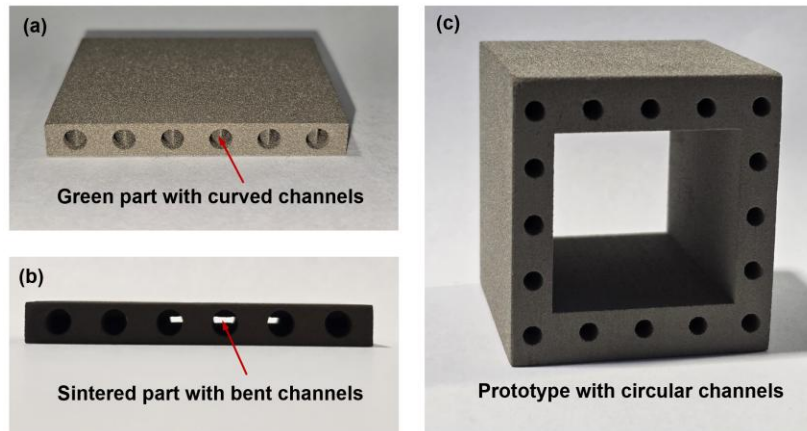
Representative samples: (a) green part, (b) sintered part, and (c) prototype with various cooling channels.
